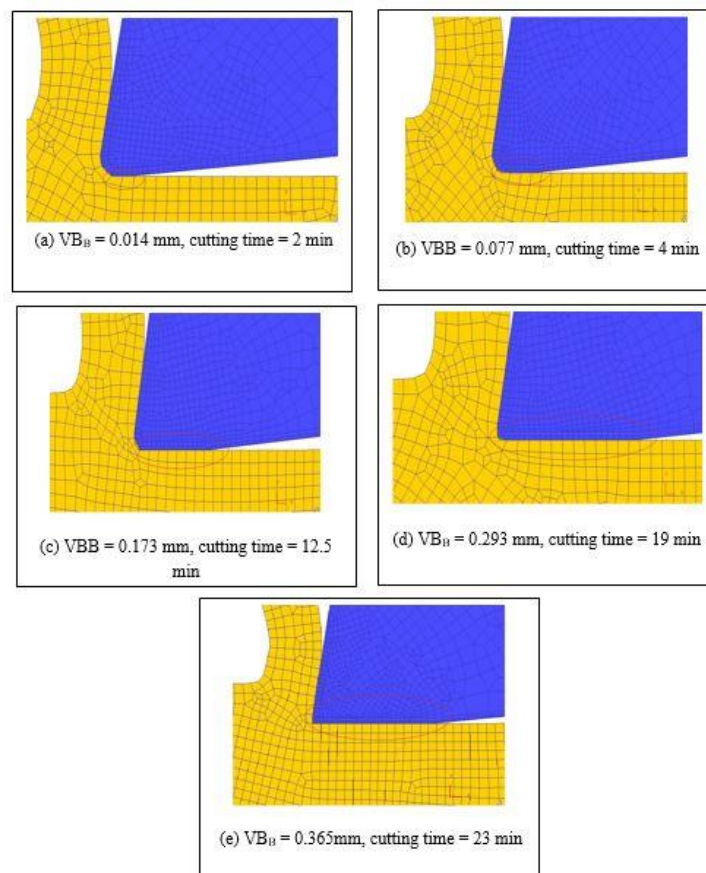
the stage of cutting tool geometry update to present flank wear (three layers coated tool)
